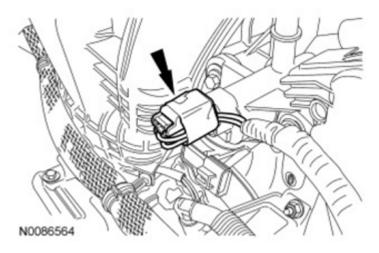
Locating Engine Oil Pressure (EOP) Switch Electrical Connector Courtesy of FORD MOTOR CO.
